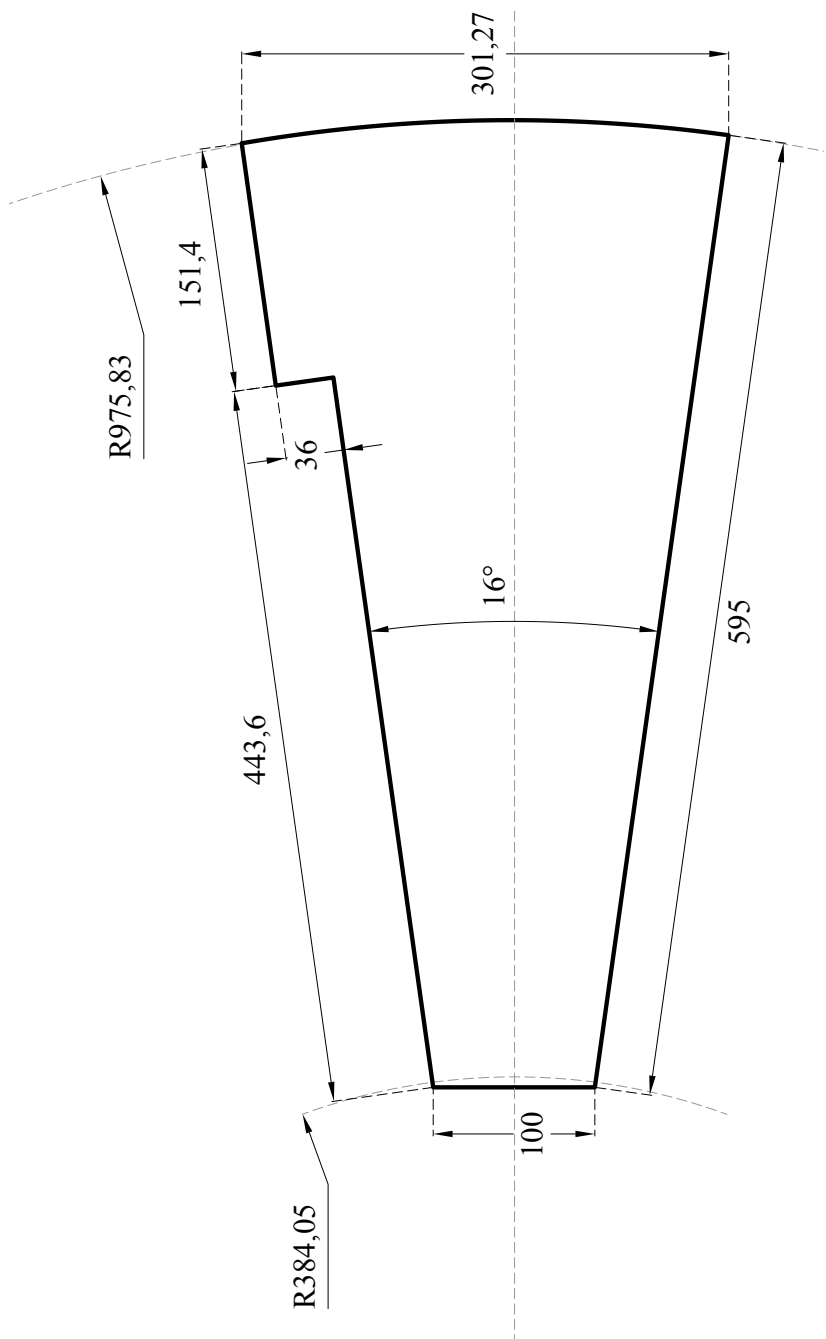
Computer drawn sketch of the LTF-Petal.
